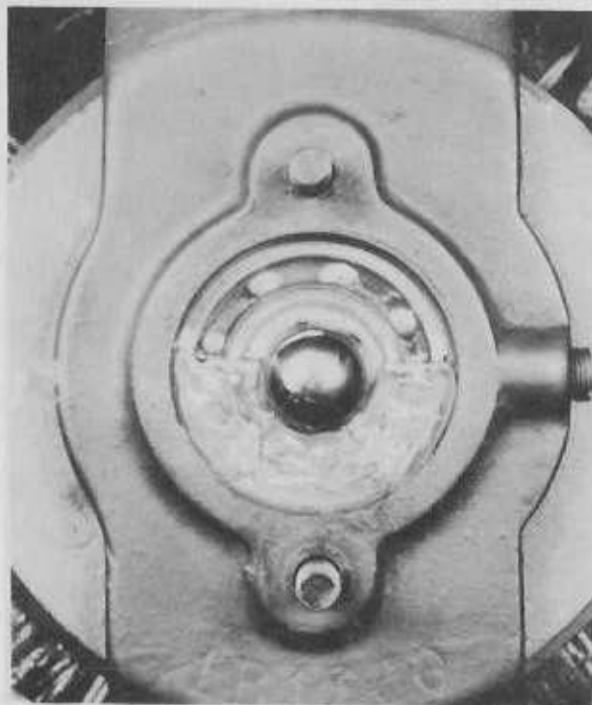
GENERATOR BALL BEARING PROPERLY LUBRICATED
